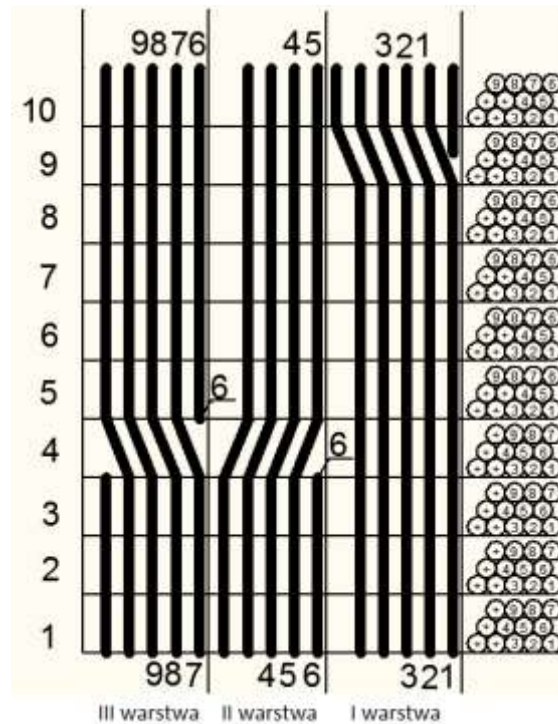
Development of surfaces of winding of drum's lining with parallel grooves and one skew transition [14]
